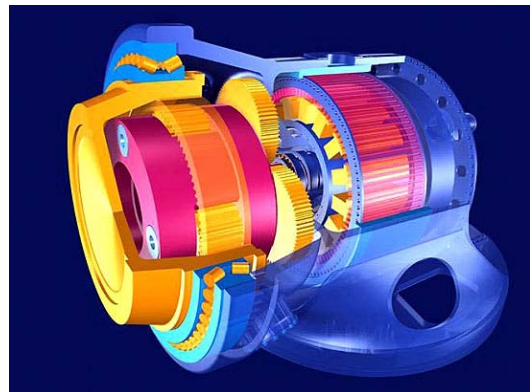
Rotor bearings, gearbox and generator assembly of M5000 wind turbine. Source: Multibrid.
